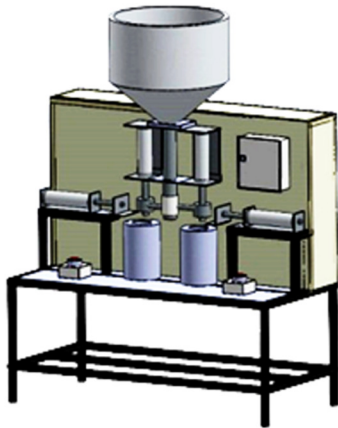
Prototype for the semi-automatic double-head rice puffing machine.
